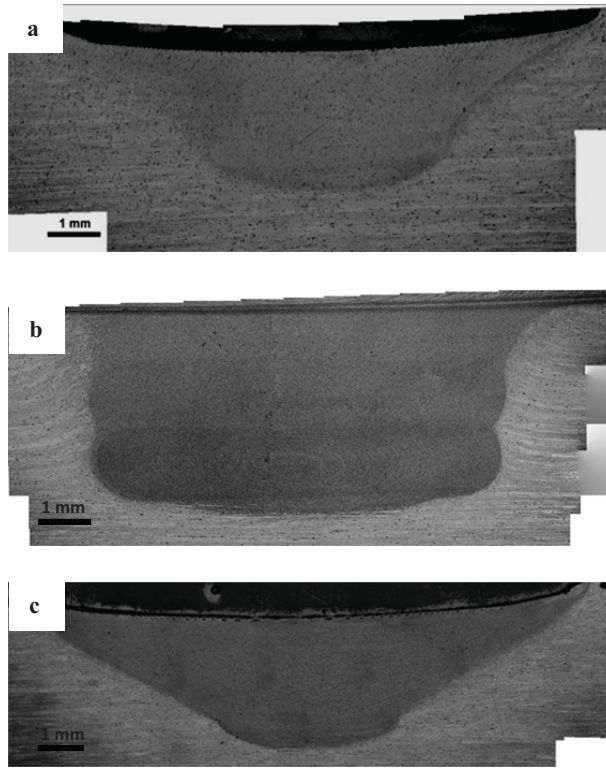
Optical macrographs showing the stir zone shape of samples friction stir processed with (a) the grooved pin, (b) the 3-flat threaded pin and (c) the conventional threaded pin.
